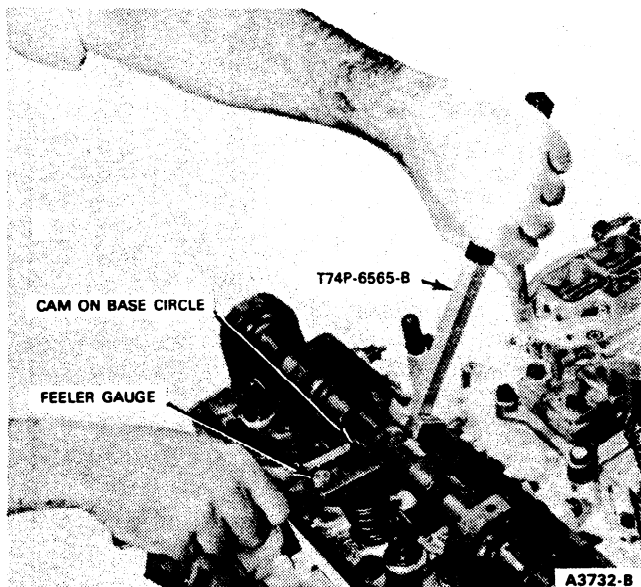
Checking Hydraulic Valve Lash Adjuster
